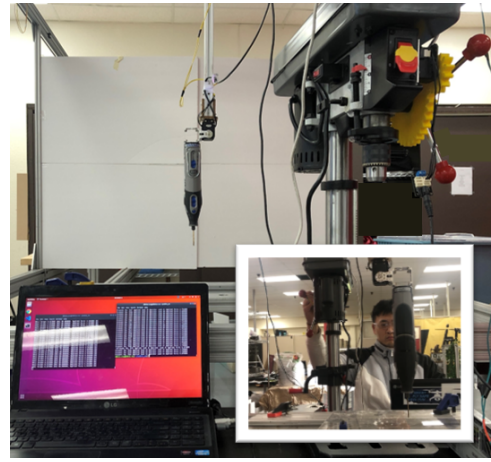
The haptic drill press (top-right), drill manipulator (background), and operator pressing the drill onto a test material (inset)
